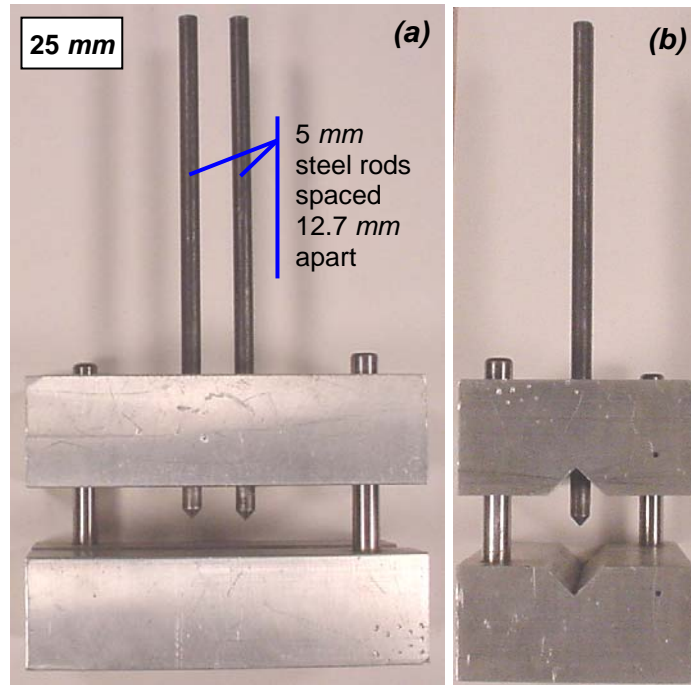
Aluminum holder used for indenting fatigue specimens (a) front view (b) side view.
